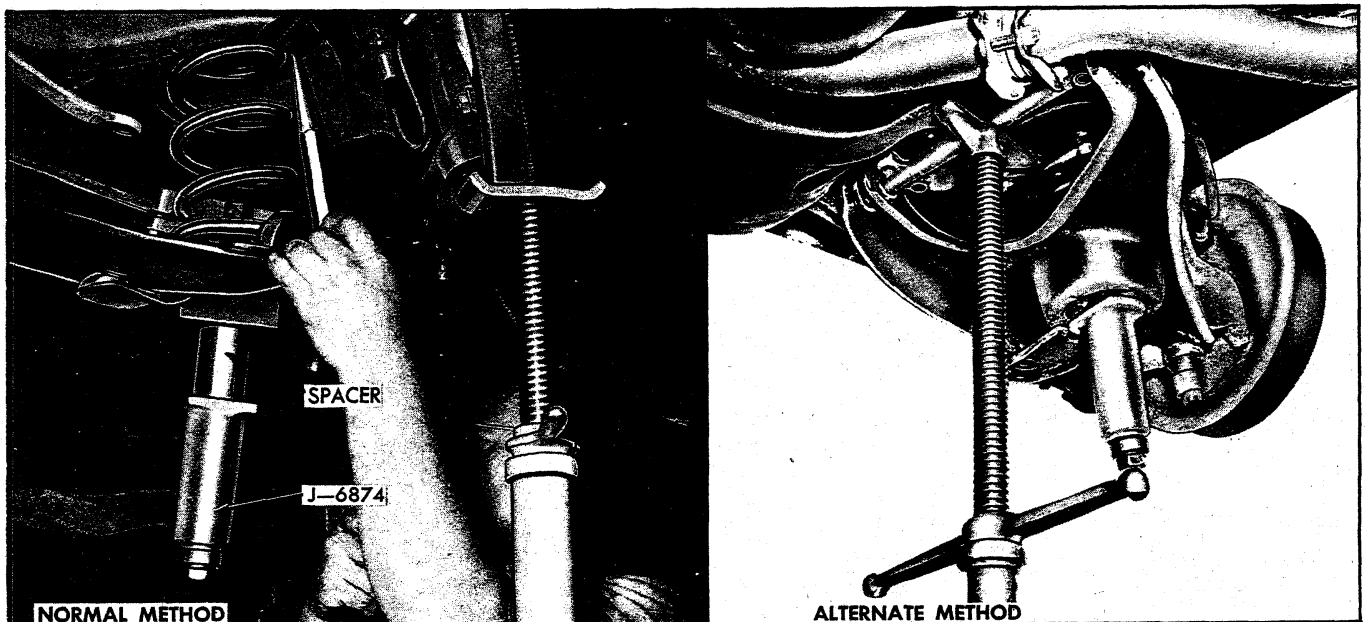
Removing or Installing Front Coil Spring - Corvette (Typical)
